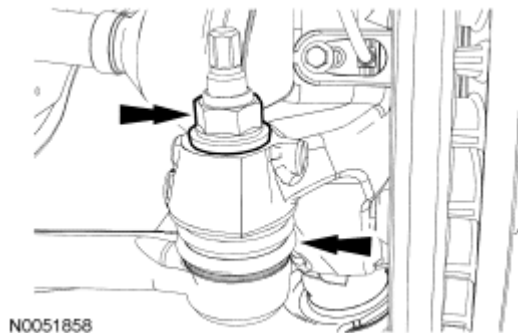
Identifying Tie-Rod End Nut And Wheel Knuckles
